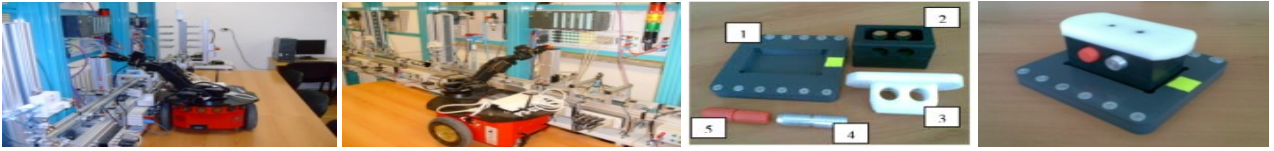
a) and b) assembly line, Hera, served by WMR, Pioneer 3-DX, equipped with RM, Pioneer 5-DOF Arm; c) parts; d) assembled product
